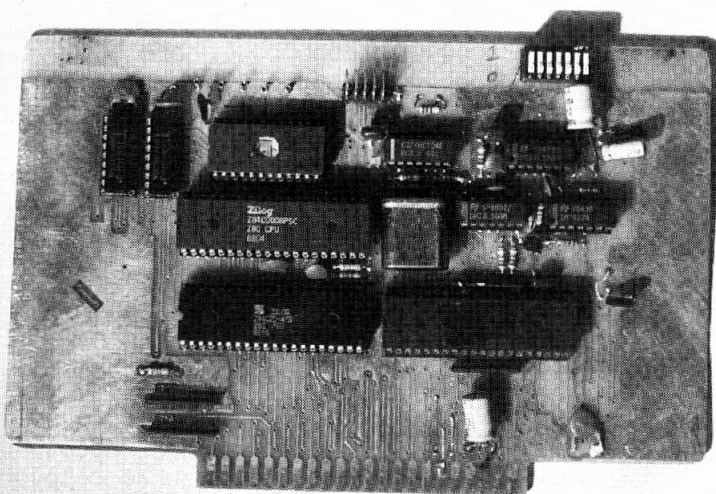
FULLY ASSEMBLED CPU BOARD.
